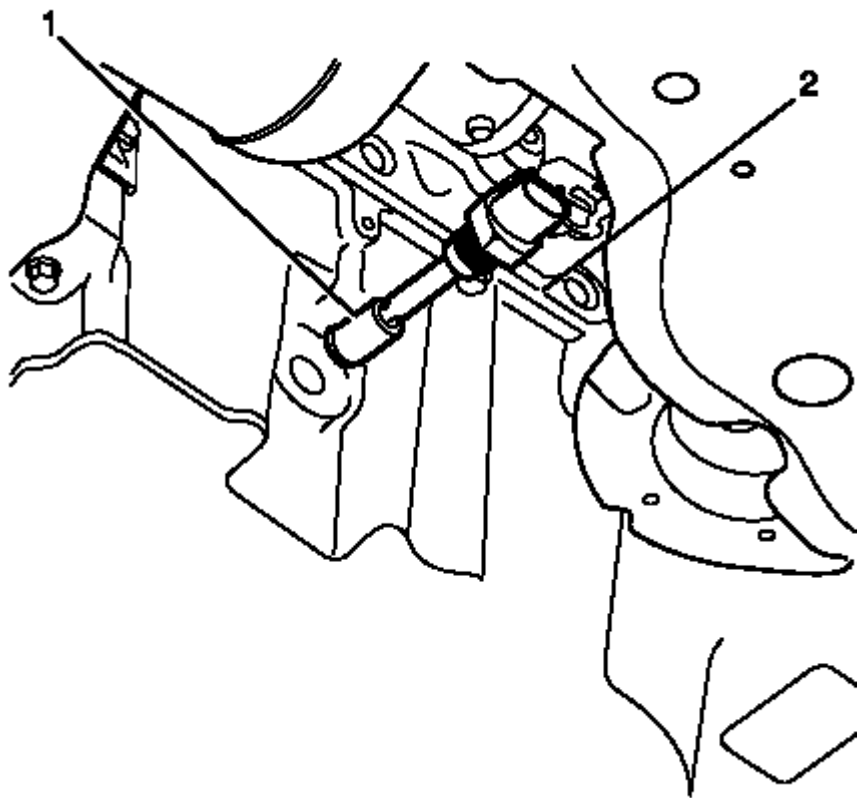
Identifying Engine Oil Lever Sensor & Oil Pan
